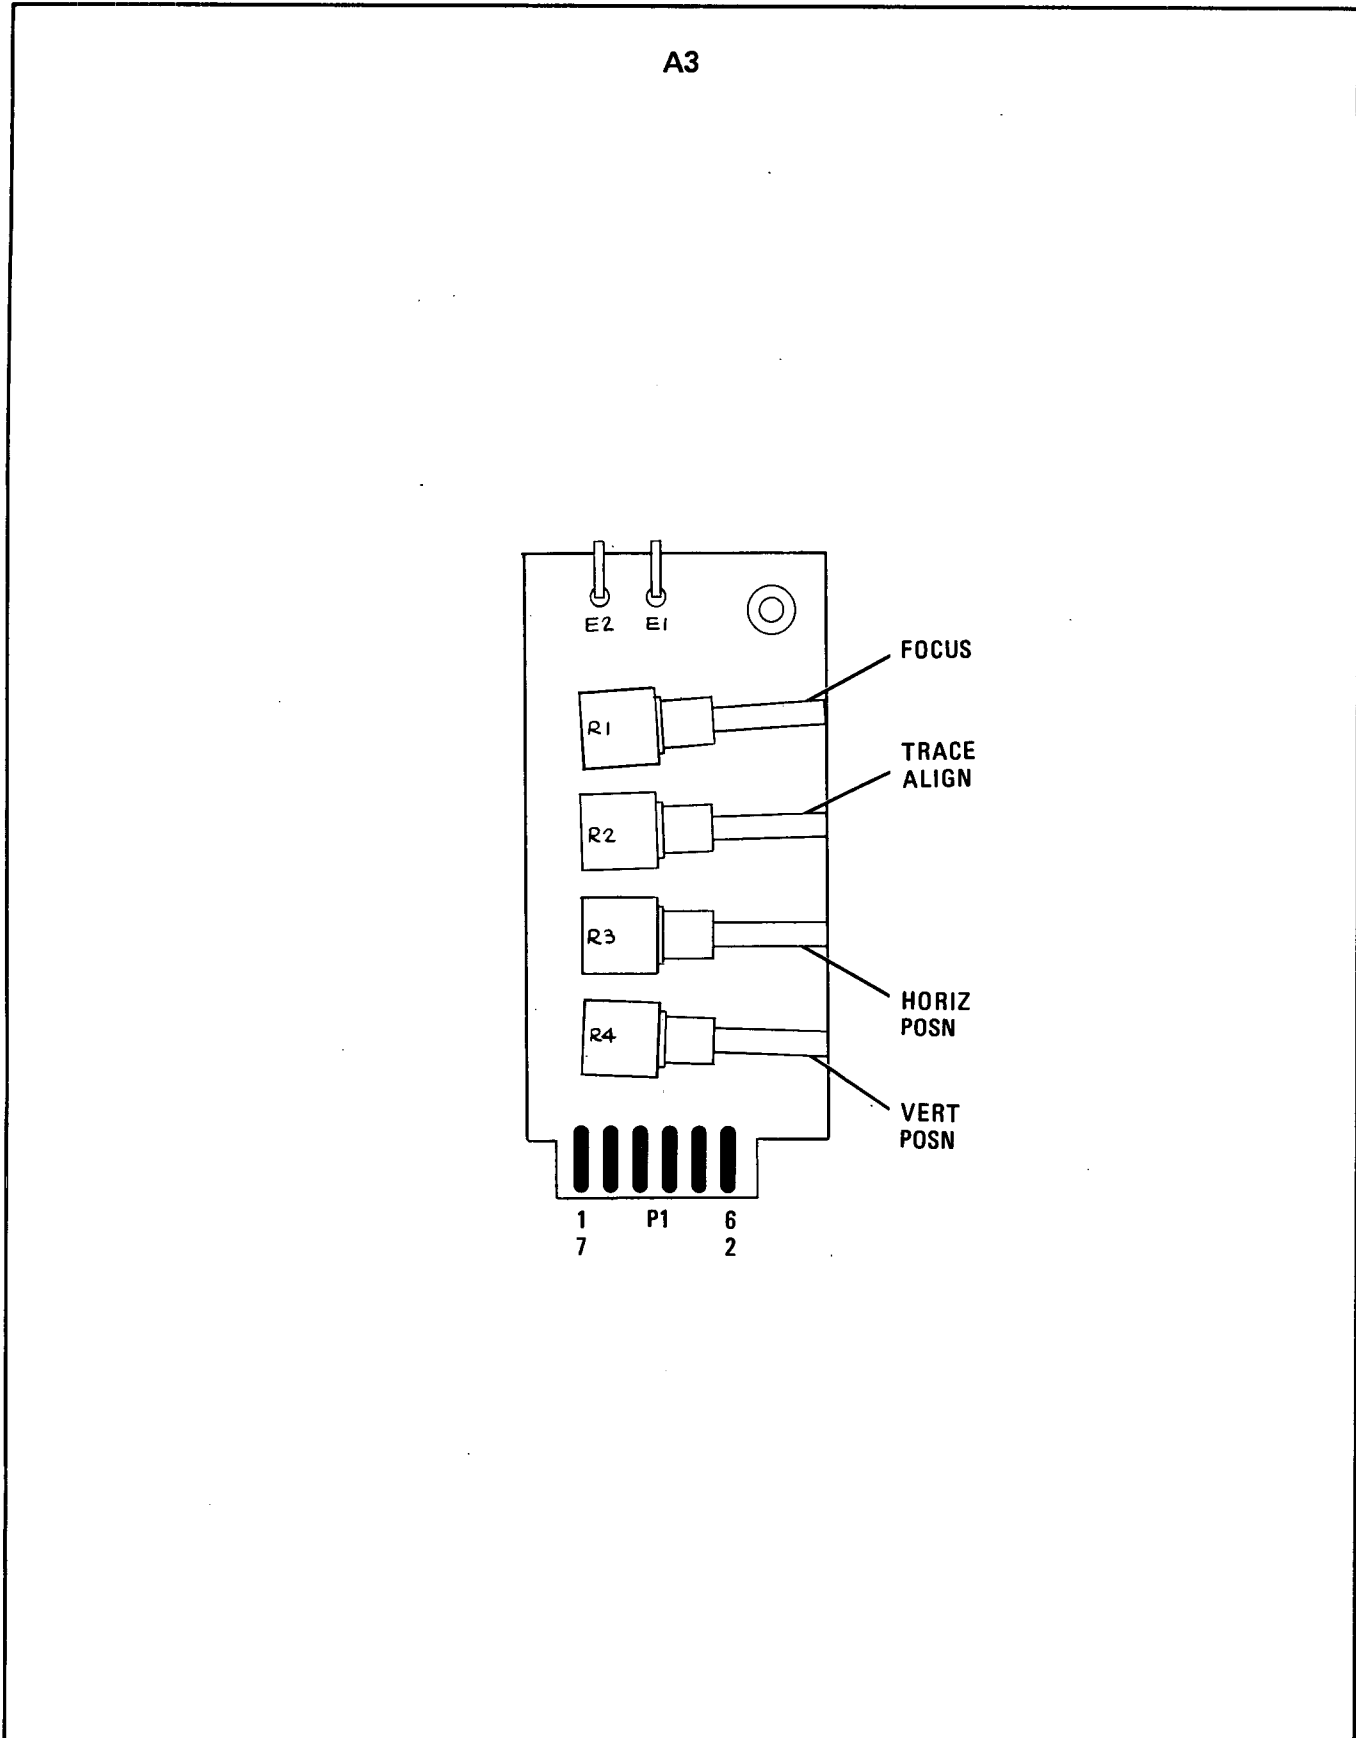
A3 Display Adjust Assembly, Component Locations
